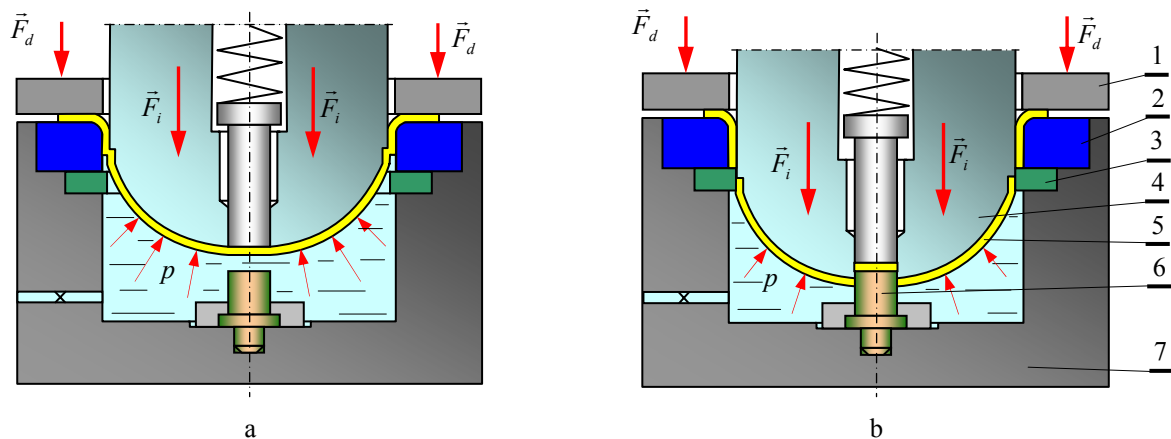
Hydro mechanical deep drawing out of semi sphere: 1 - blank holder; 2 - drawing ring; 3 - cutting ring; 4 - punch; 5 - blank; 6 - punching tool; 7 - lower of tool (container)
